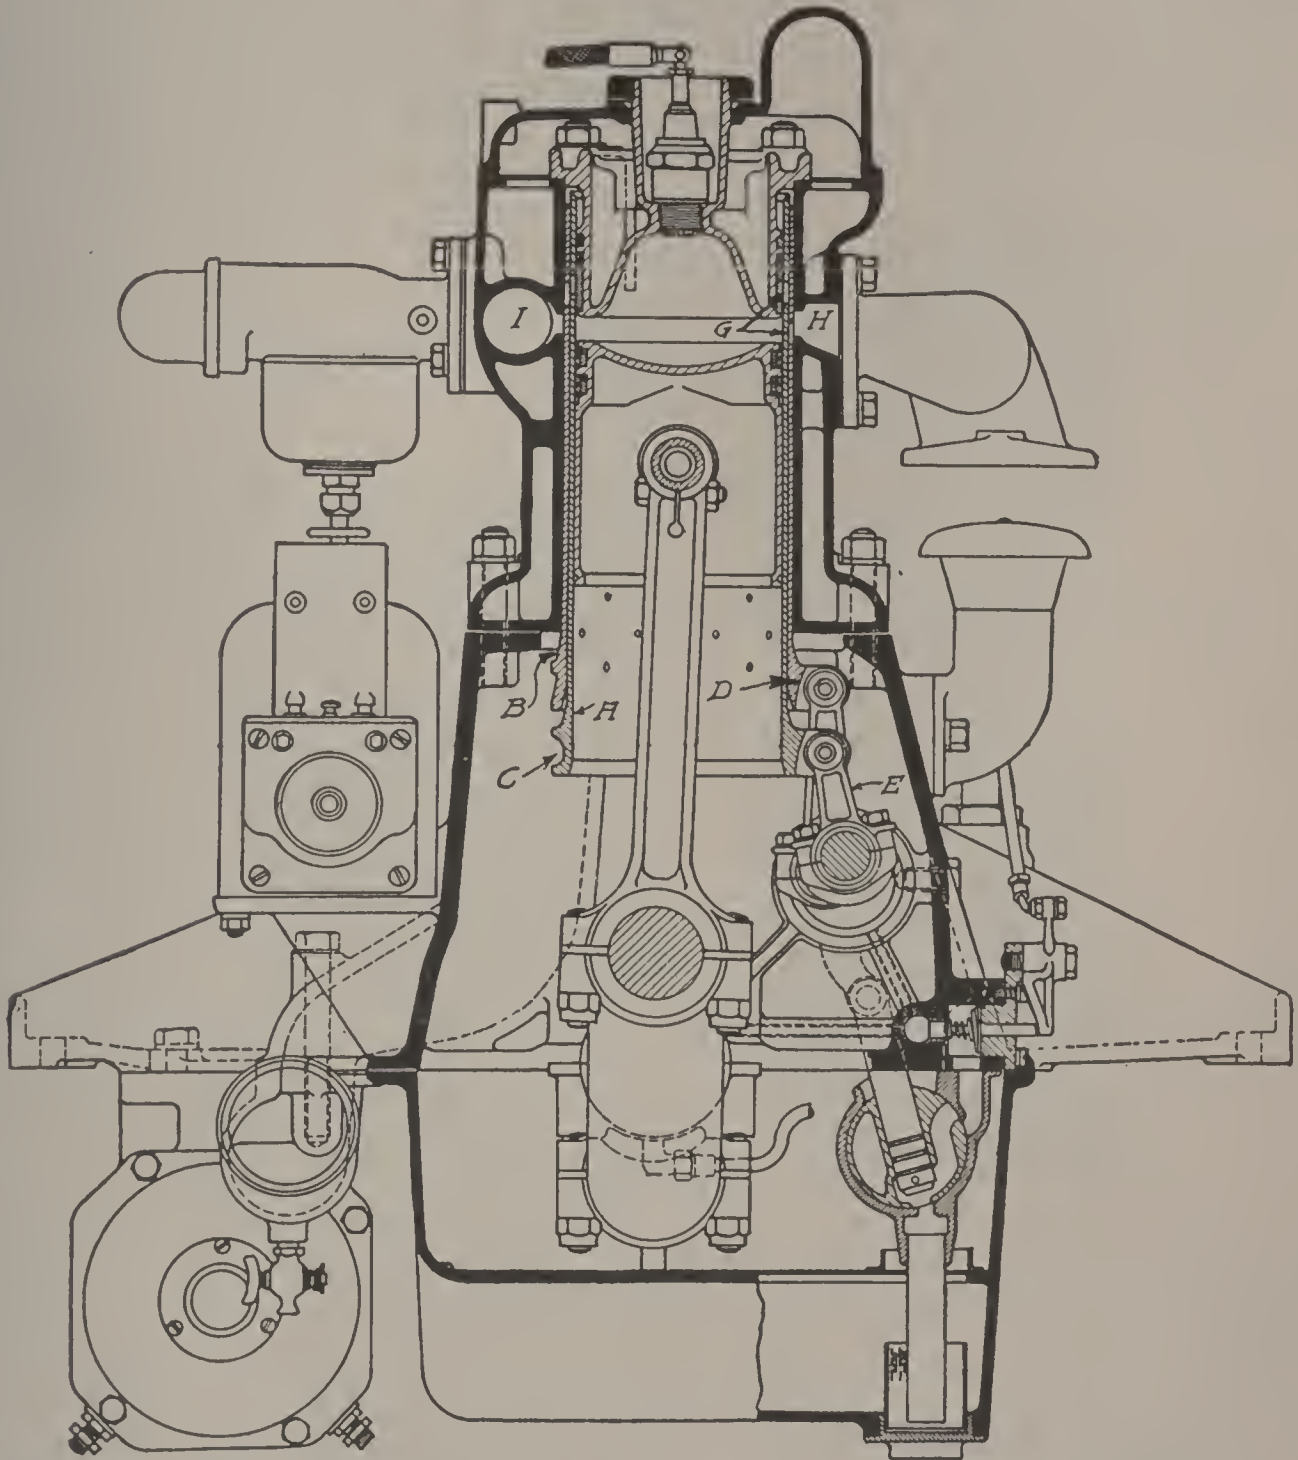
Willys-Knight Engine in Which Eccentrics and Sliding Sleeves Replace Cams and Valves
